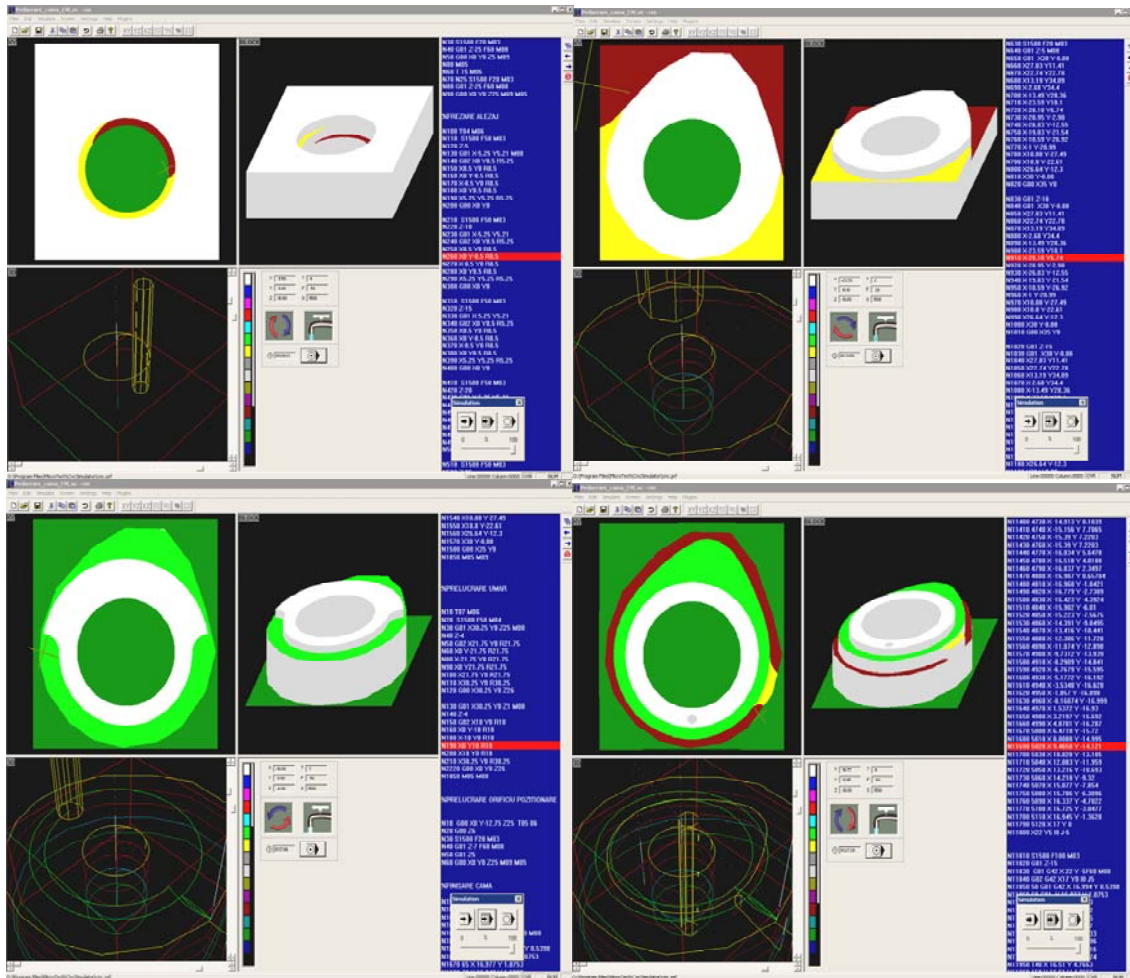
Cam processing simulation: a) bore milling; b) roughing milling of the cam profile; c) cam collar milling; d) finishing milling of the cam profile
